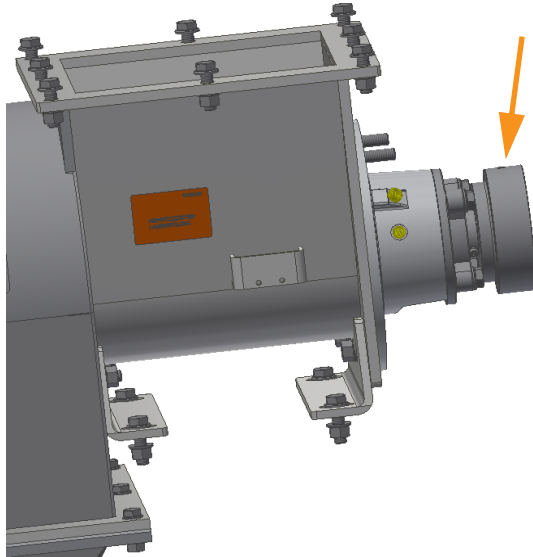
Bearing housing (drive side): Setscrew on coupling half.
